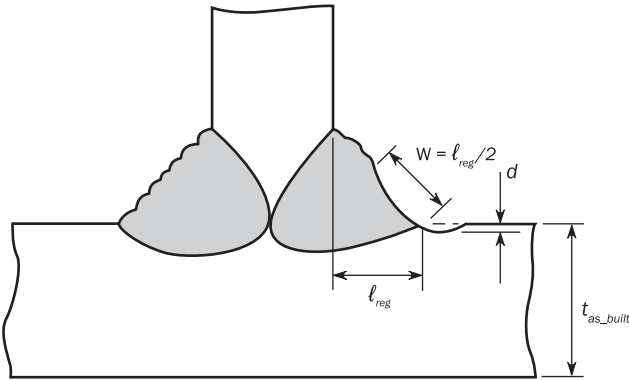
Extent of weld toe burr grinding to remove inter-bead toes on weld face
